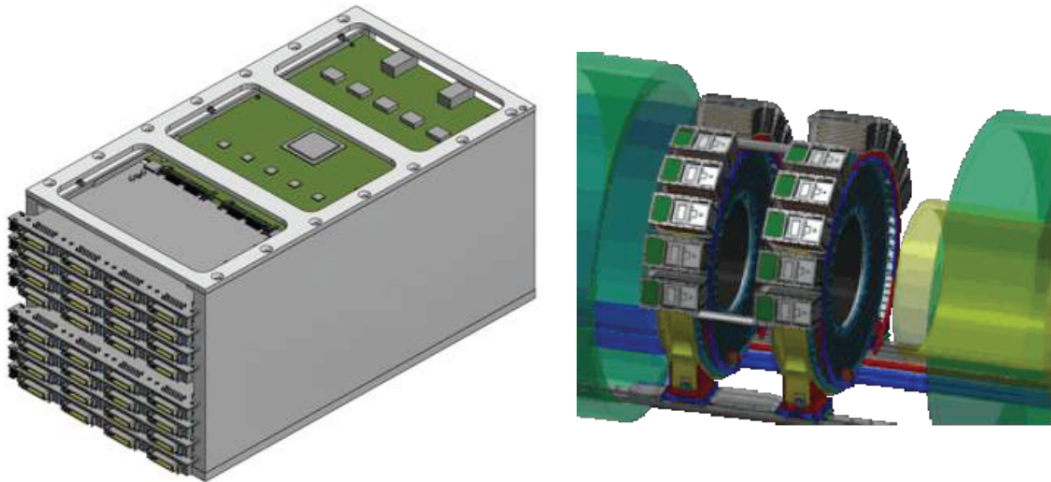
CAD drawing of the crate hosting boards and drawing of crate inside the Calorimeter.
